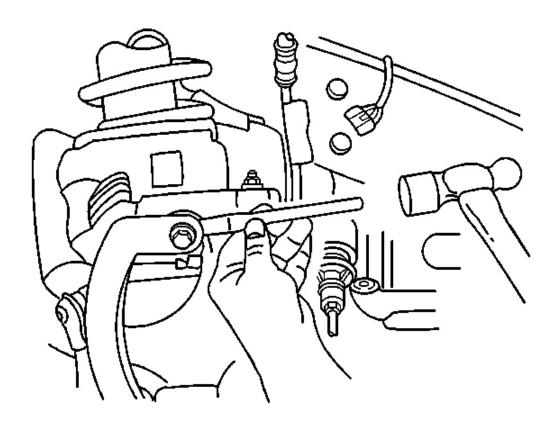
Spreading Shock Module Yoke Courtesy of GENERAL MOTORS CORP.
